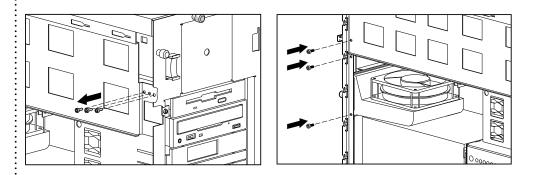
Three set screws mounted on the chassis under the side panel are provided for optional use to lock rear-mounted, quick release modules in place. If moved to the indicated positions, these three screws will secure the processor module, the I/O module, and the fan against quick release and removal.
